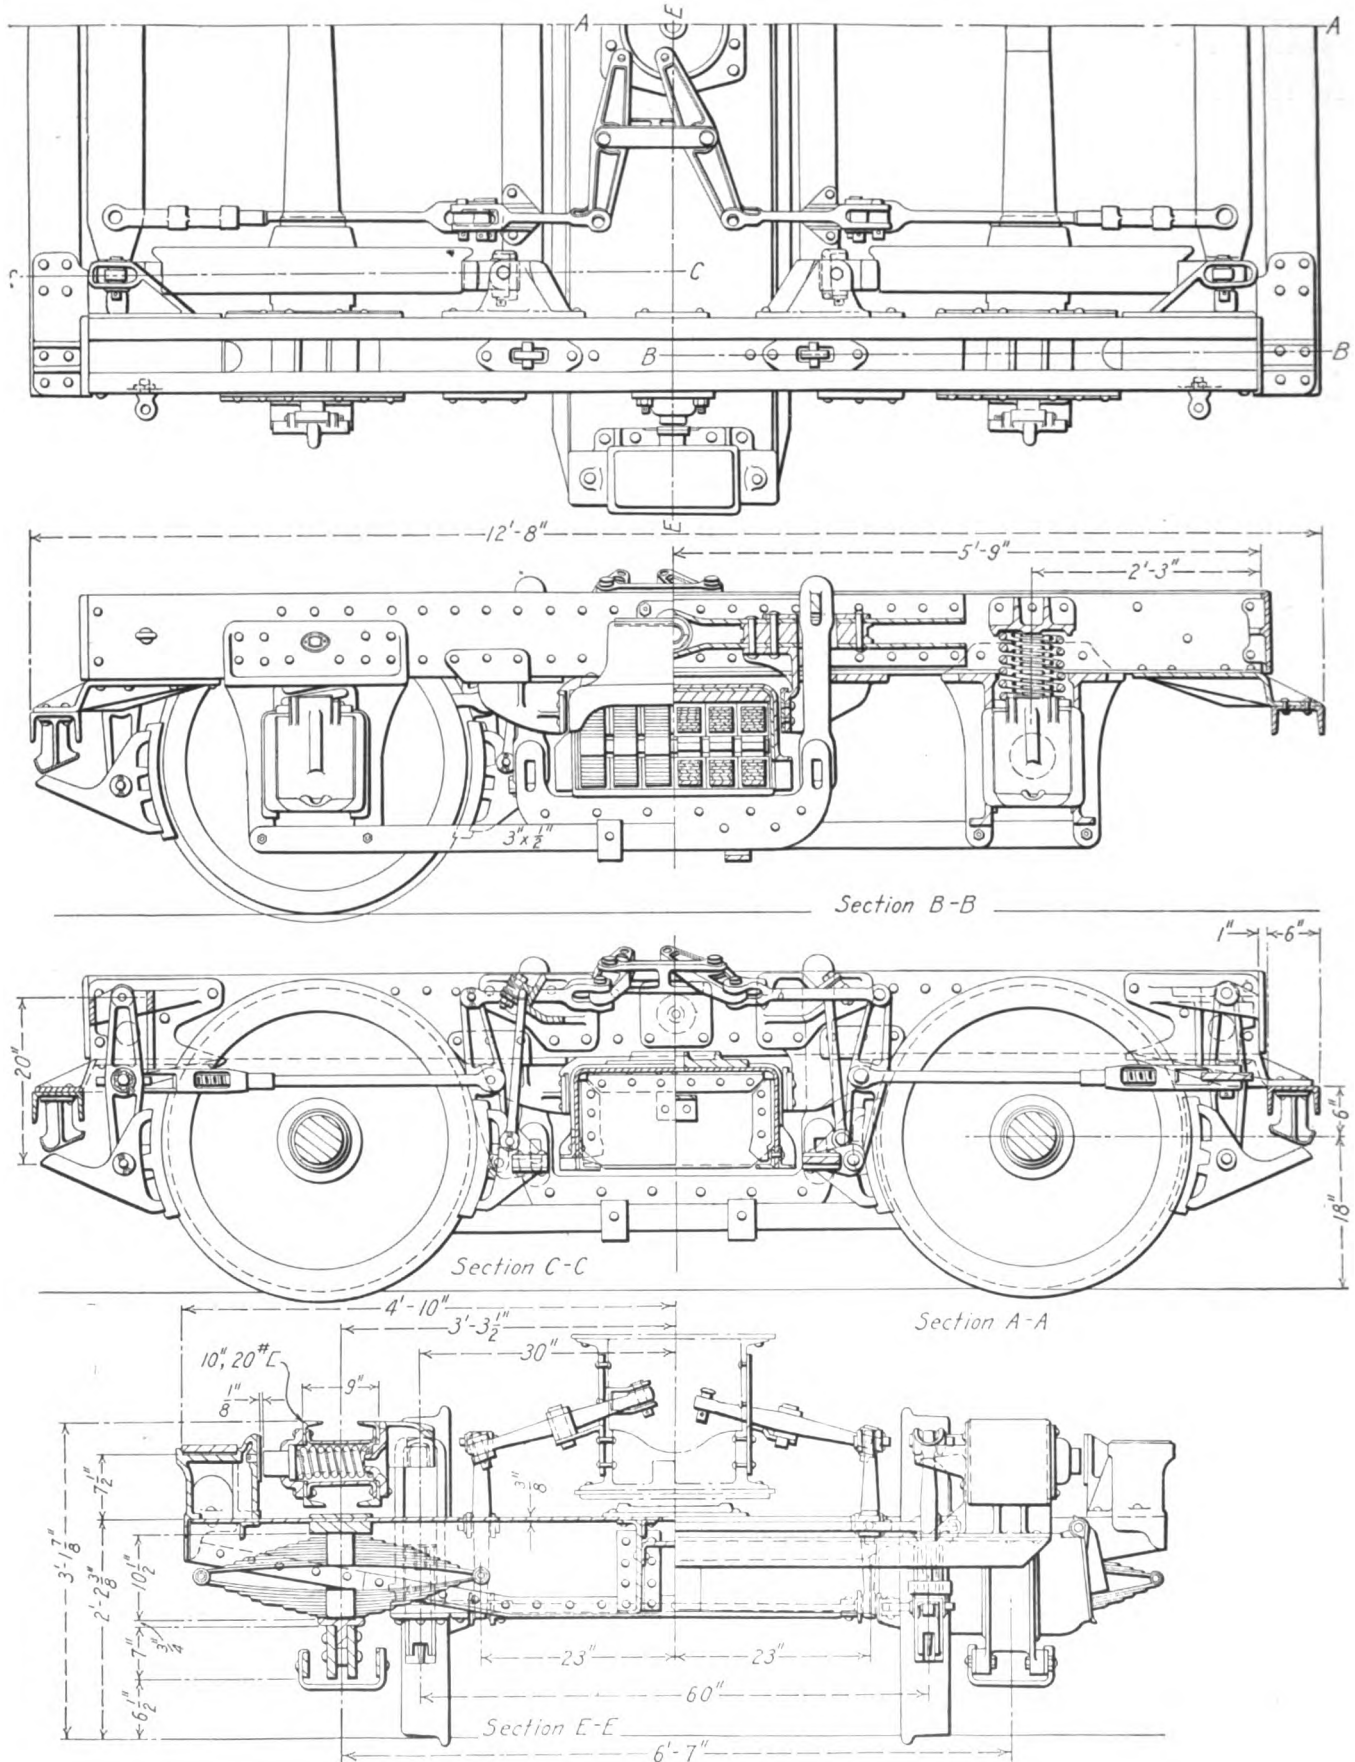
Original Four-Wheel Steel Passenger Car Truck with Clasp Brakes Applied; Pennsylvania Railroad
